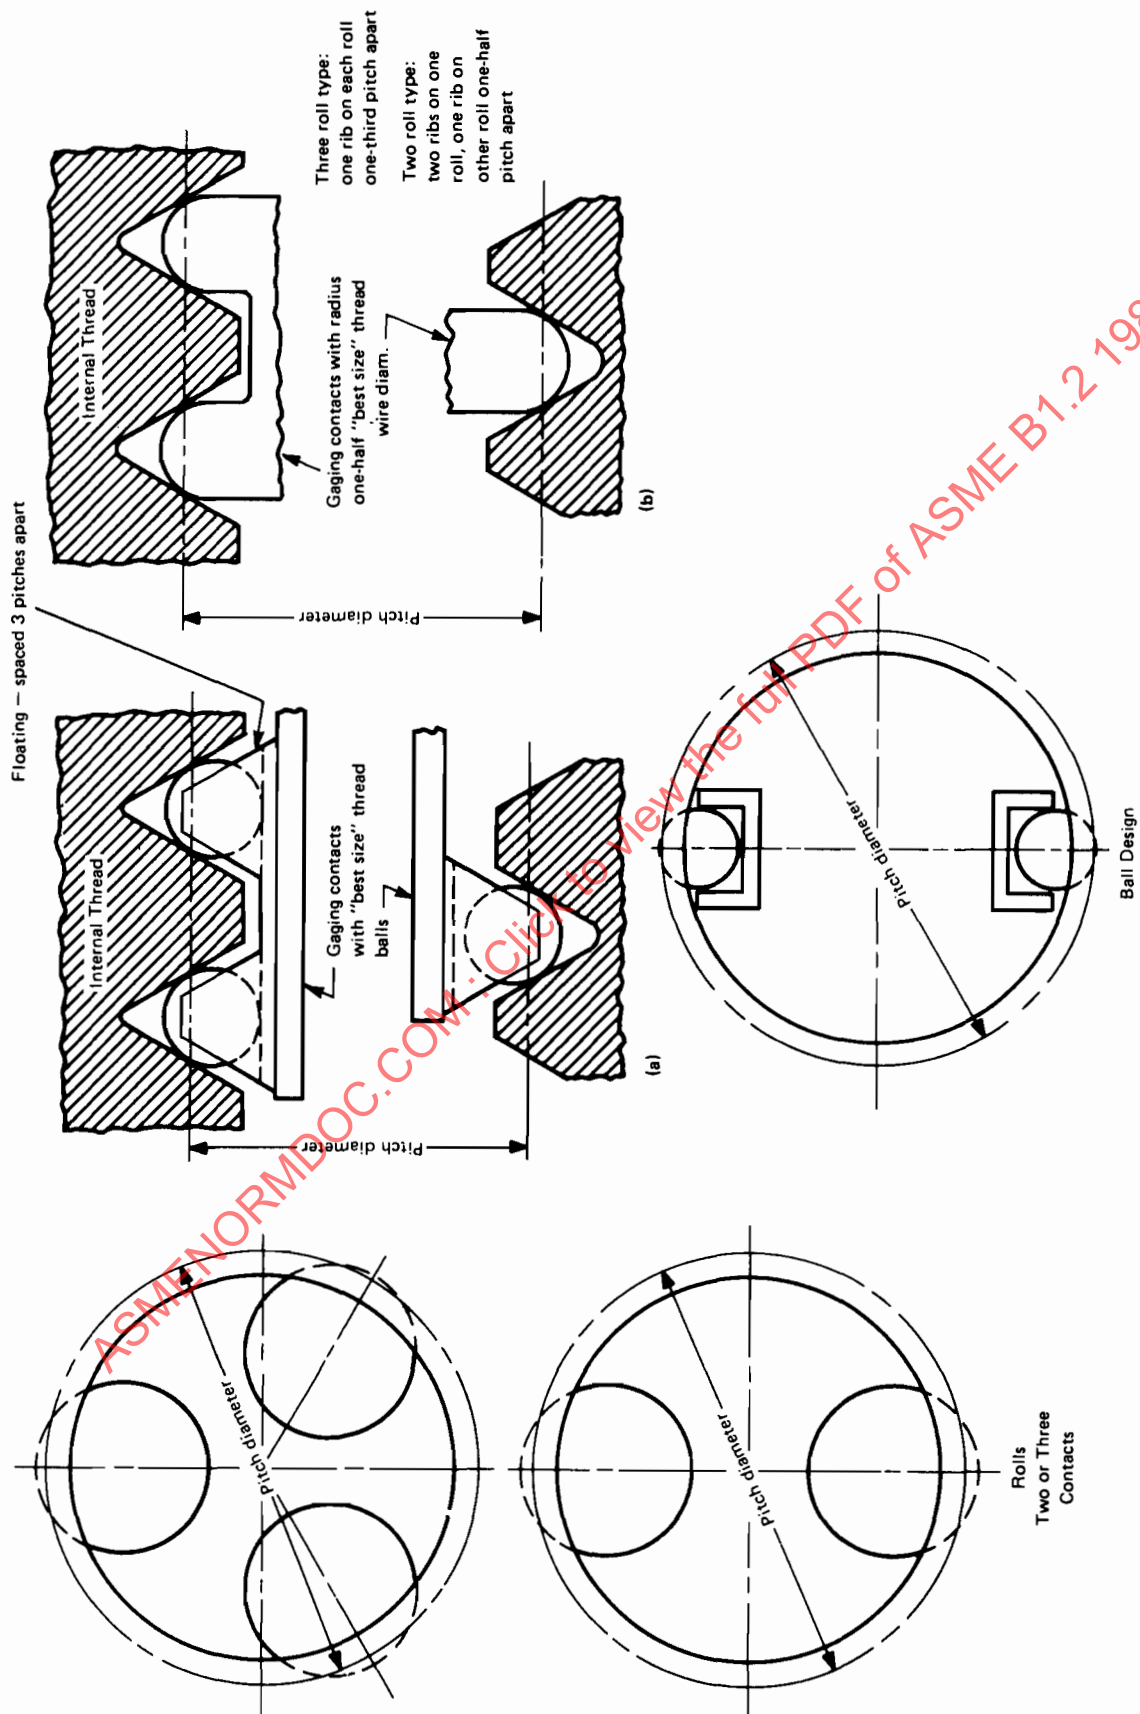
INDICATING THREAD GAGES — MINIMUM-MATERIAL PITCH DIAMETER
